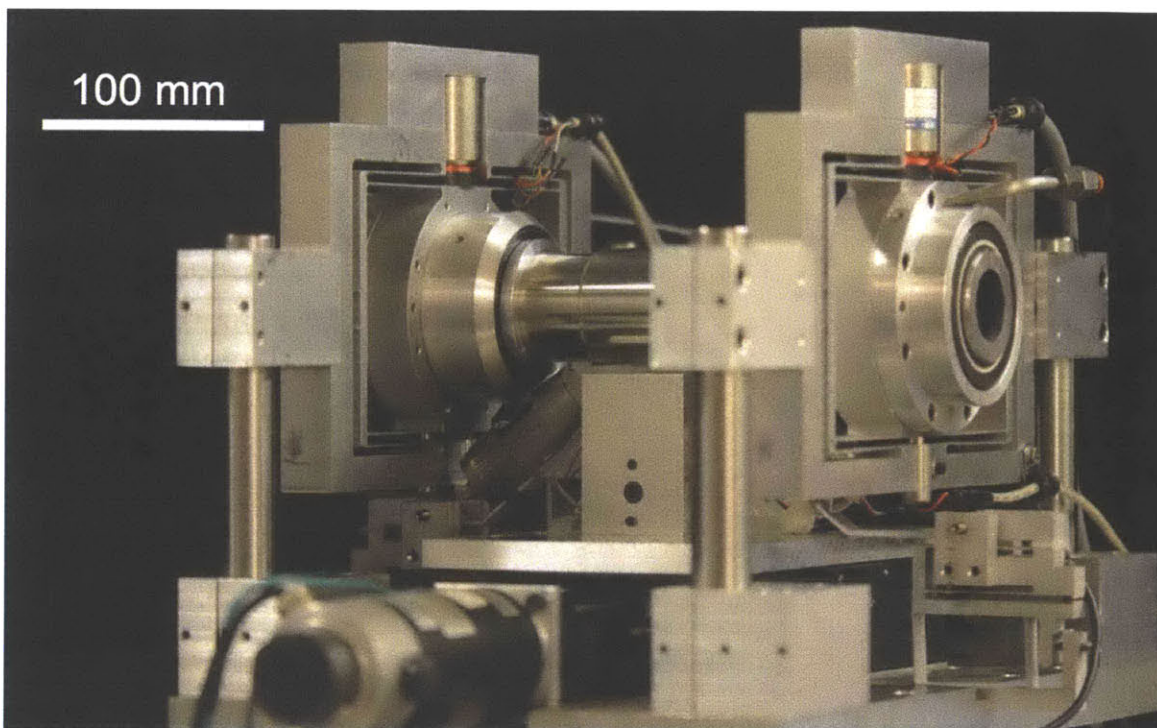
The roll-to-plate microcontact printing machine developed by Petrzelka [19]. This machine utilized parallel kinematic flexure stages to give control over the height and tilt of the print roll. A linear positioning stage below the print roll was designed to carry a wafer or glass microscope slide substrate. As well, an optical prism could be mounted on the linear positioning stage, allowing for real-time *in-situ* visualization of the contact region between the round stamp and flat substrate.
